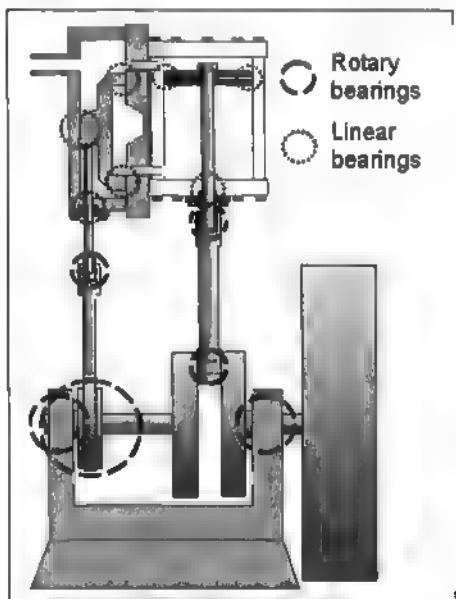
Cross-section through a single-cylinder steam engine showing the rotary and linear bearings.
